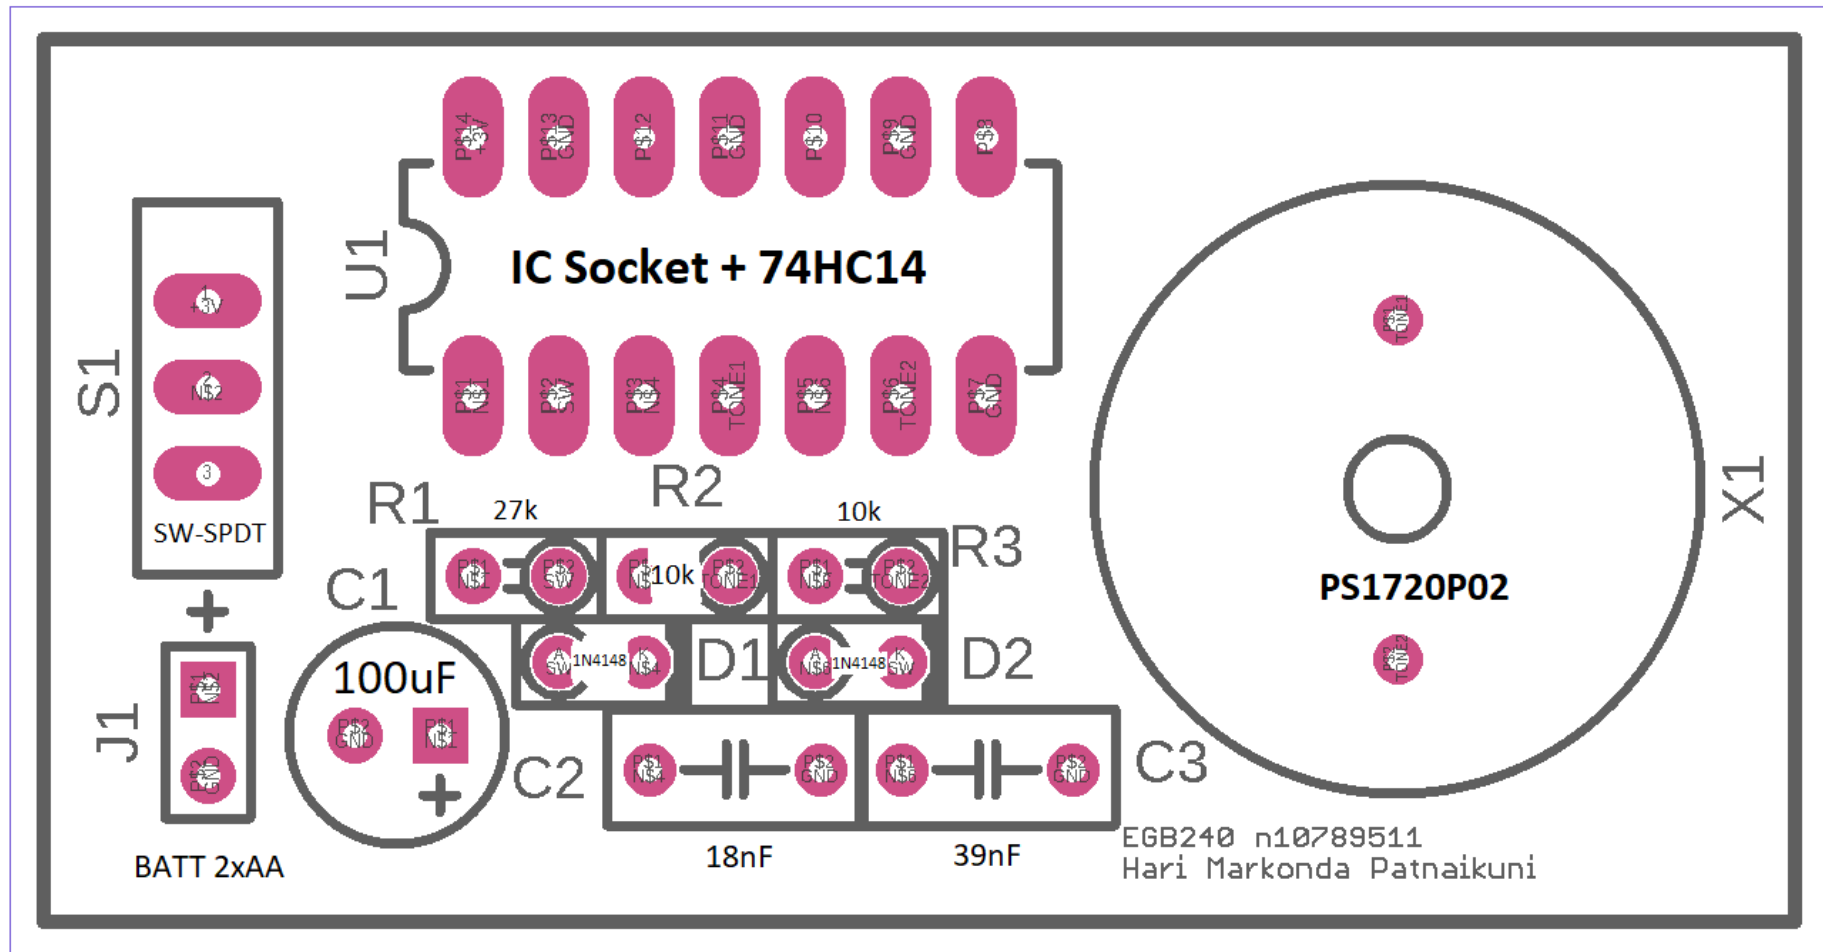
Siren circuit PCB layout with board dimensions in millimetres.
